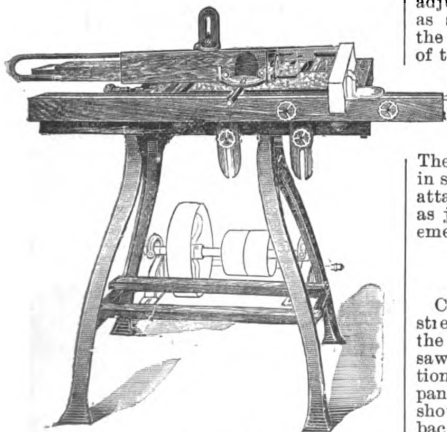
Guide for Parks, Light Power Wood Working Machine.
